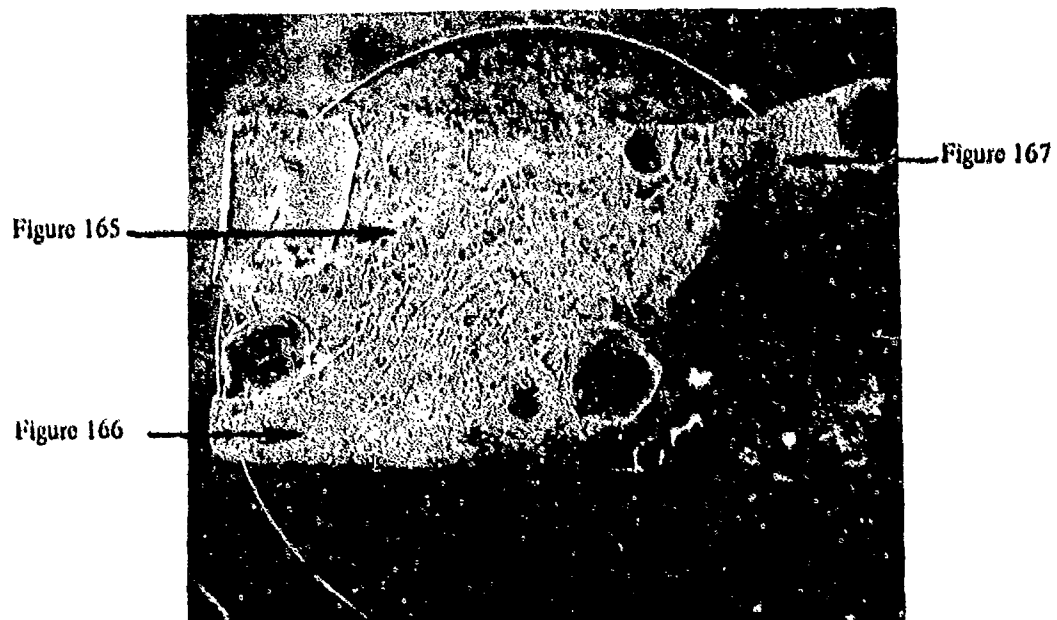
Fatigue fracture surface of a hydrogen-embrittled AX-110 weldment containing porosity, 8x.
